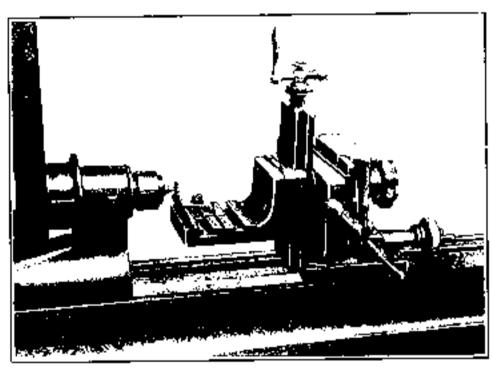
Milling Attachment with Angle Iron set as plain miller to mill keyway in shaft
